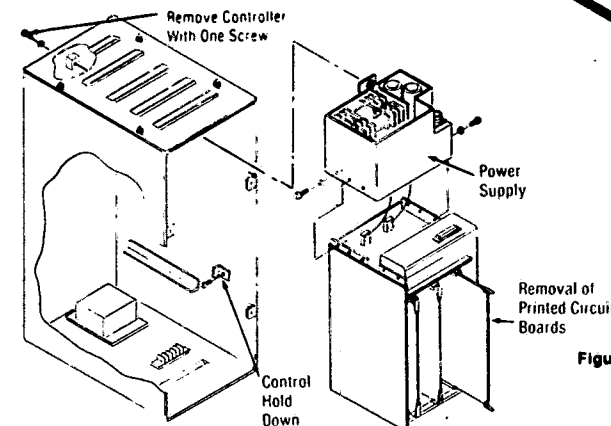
CONTROL CONSOLE ASSEMBLY.
